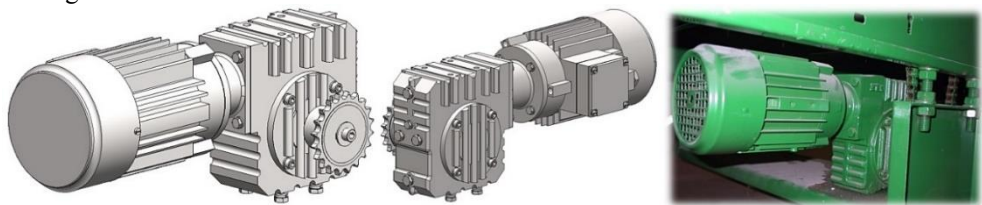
Roller track drive unit consisting of an electric motor and worm gearbox.
